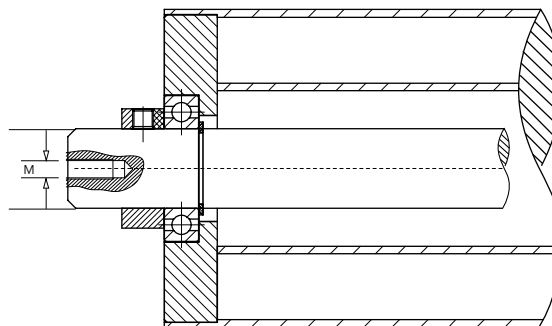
Example of through-shaft with special head outside roller and ABU lock rings
